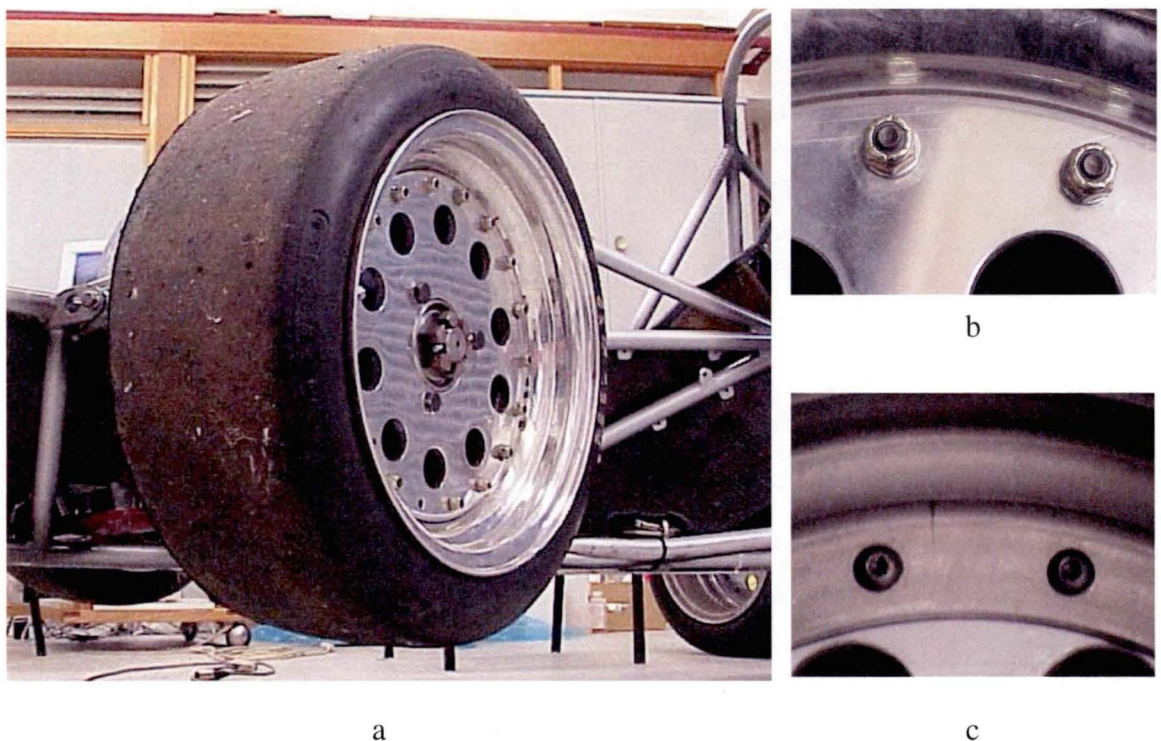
a) Three piece rim, b) outside view of rim bolts, c) inside view of rim bolts.
